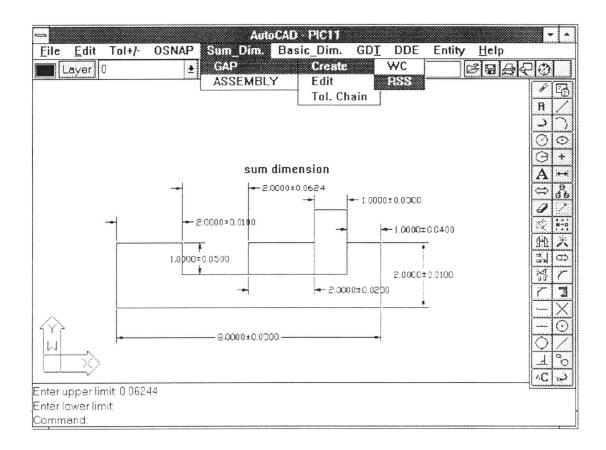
The Application of Pull-Down Menu "RSS" for Determining Sum Dimension with Root Sum Squares Assembly Tolerance Analysis Model
